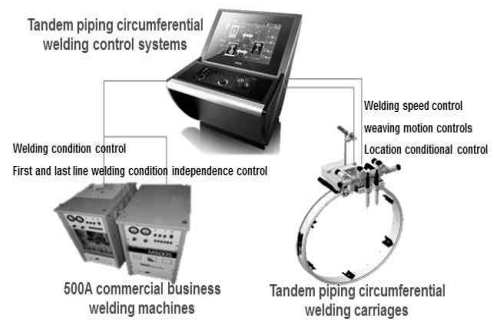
View of automatic pipe tandem GMA welding carriage drive system
